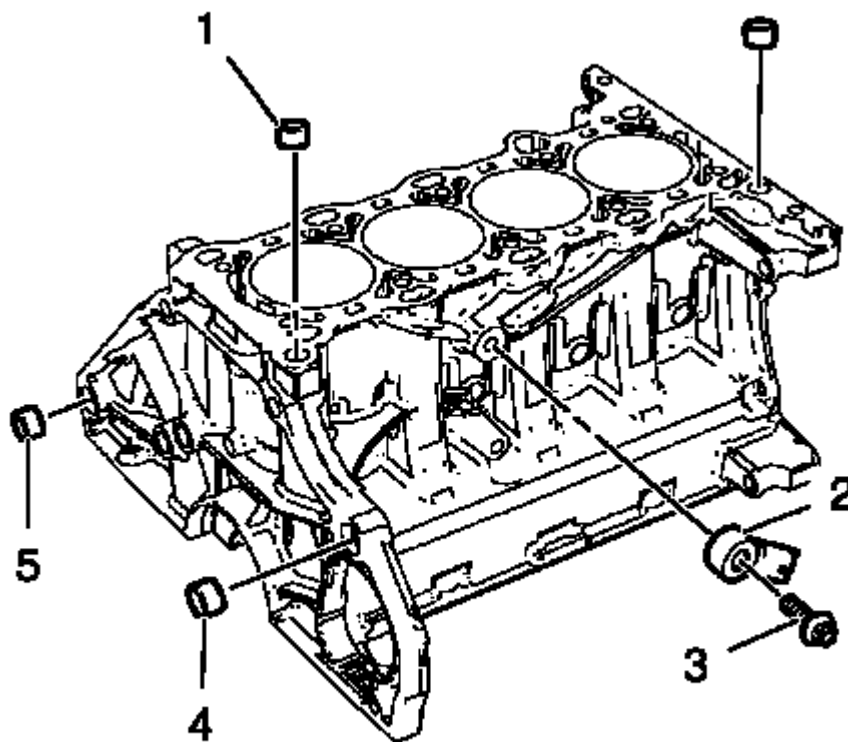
Knock Sensor, Bolt, Cylinder Head Guide Sleeves And Transmission Guide Sleeves
